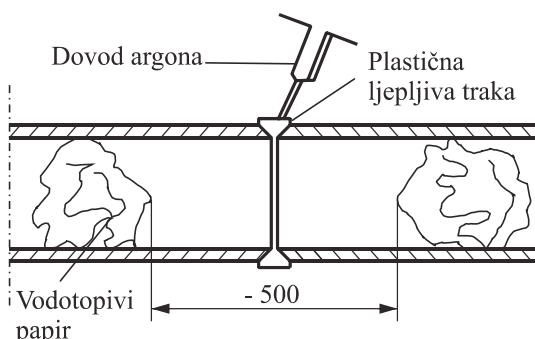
Protection during TIG welding of the root passage of X20 steel pipes [1]
